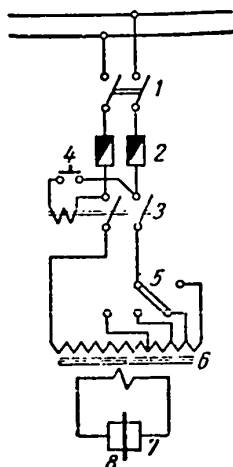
Electric Wiring Diagram of a Machine for Contact Welding
